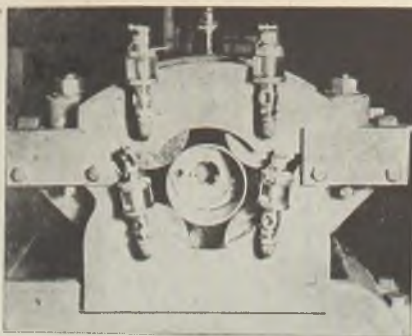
Fatigue and bonding test of full lined bearing. The four rollers deflect the bearing shell, which is rotated at 2500 r.p.m. If no cracking of the lining or bond failure occurs in 15 hours, the specimen is considered satisfactory. Courtesy Bohn Aluminum & Brass Corp.
